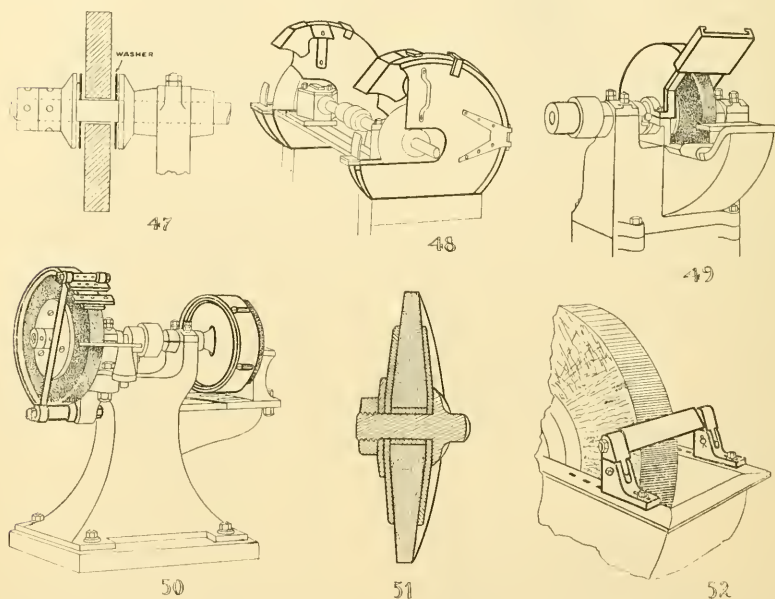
SAFE MOUNTING OF GRINDING WHEEL
